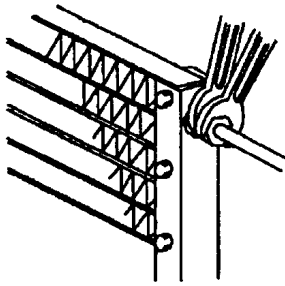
Use a Back-Up Wrench When Loosening or Tightening Fittings
